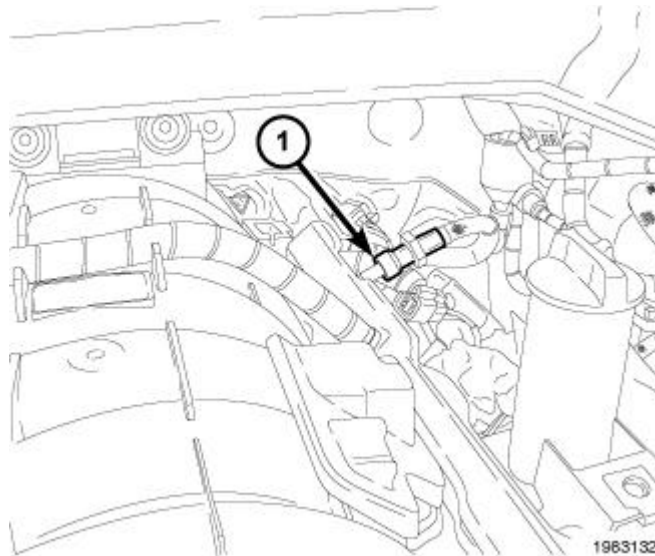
Fuel Supply Line Quick Connect Fitting At Fuel Rail
